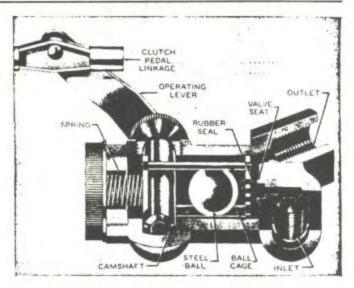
Sectional view of hill holder when clutch pedal is depressed
